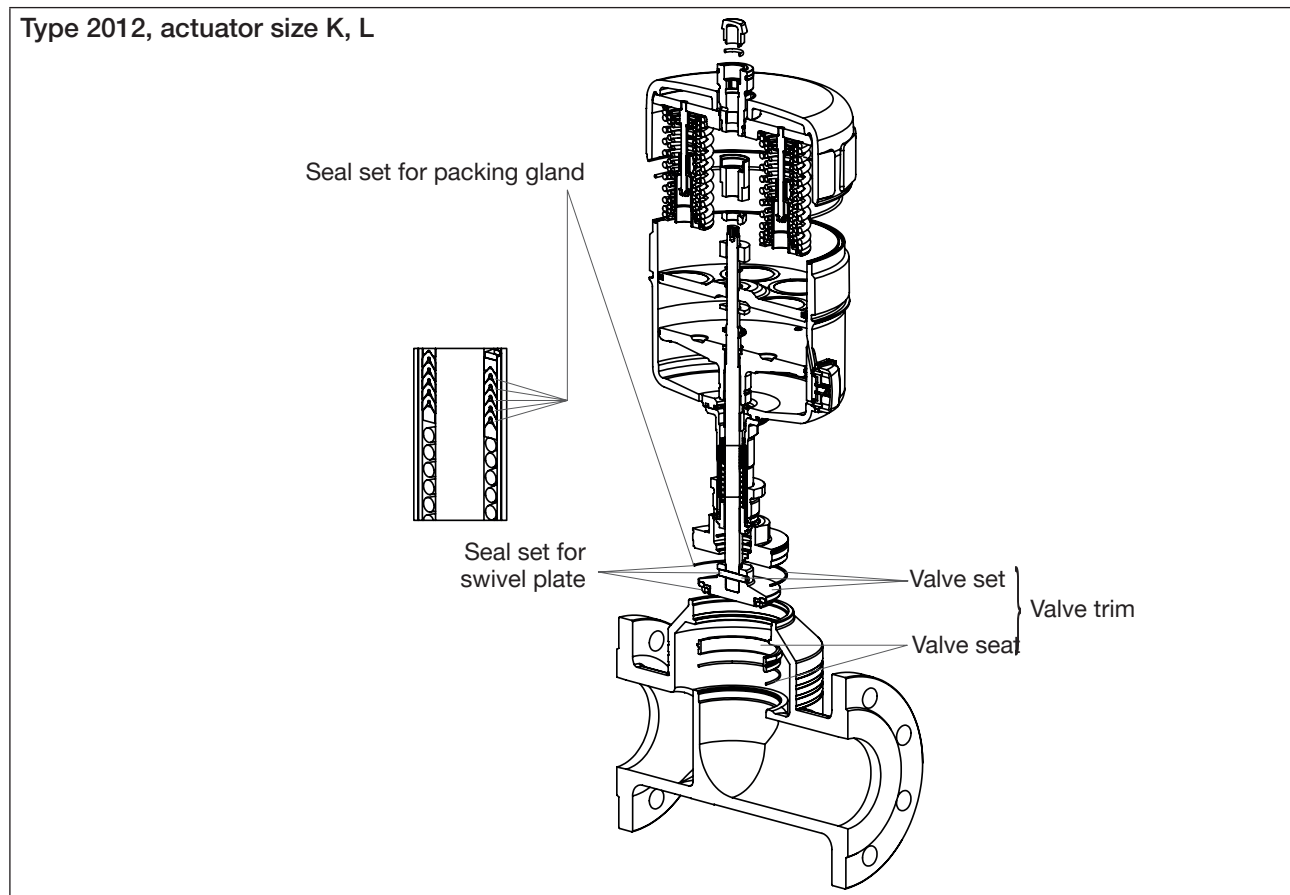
Spare part sets Type 2012, actuator size K (175 mm), L (225 mm)
